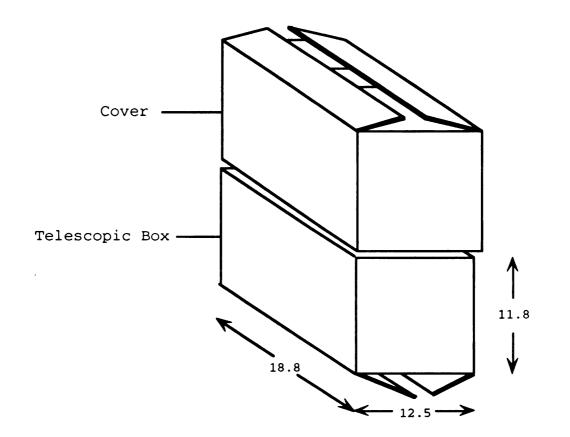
The inside dimensions of the FTHS instrumented package (All dimension in inches).
